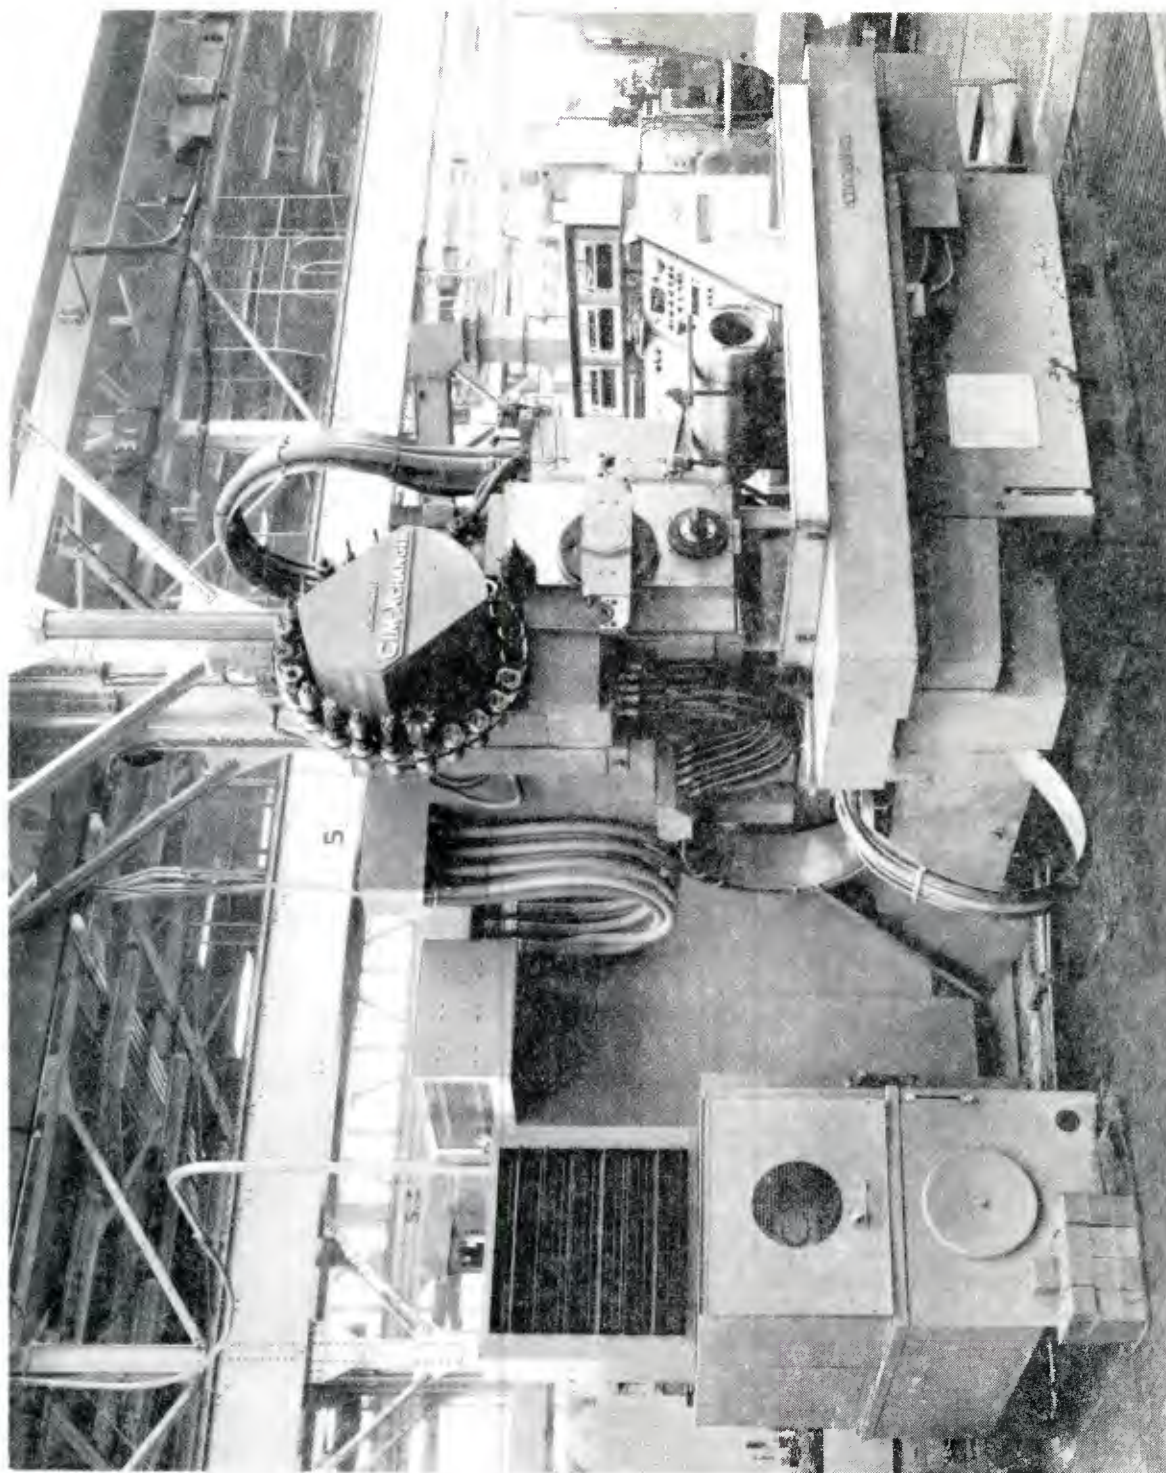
N/C machine set up for experimental machining of extractor detail on 105mm M68 Stub Tube
